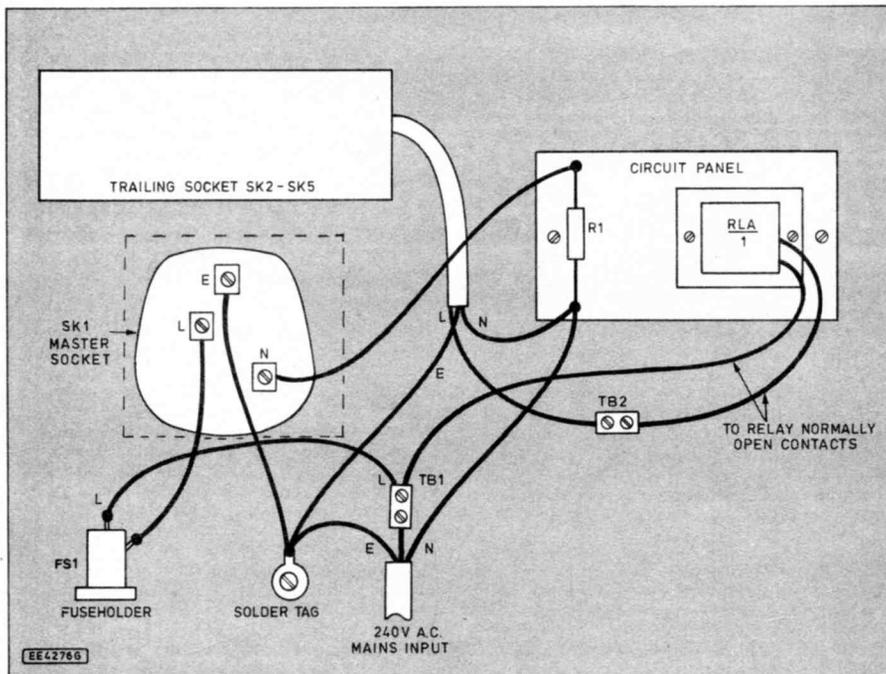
Interwiring from the circuit board to the master socket, fuseholder, “earth” tag, mains input cable and trailing 4-socket outlet strip. All wiring must be rated at 6A minimum.
